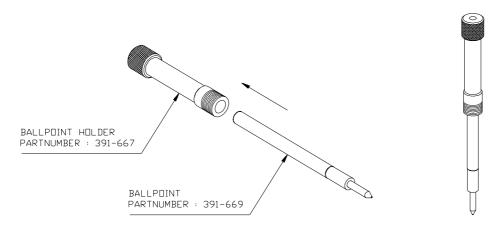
BALLPOINT PEN ASSEMBLY
